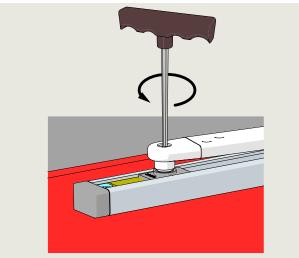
Fastening drive arm with CPD to pivot pin
